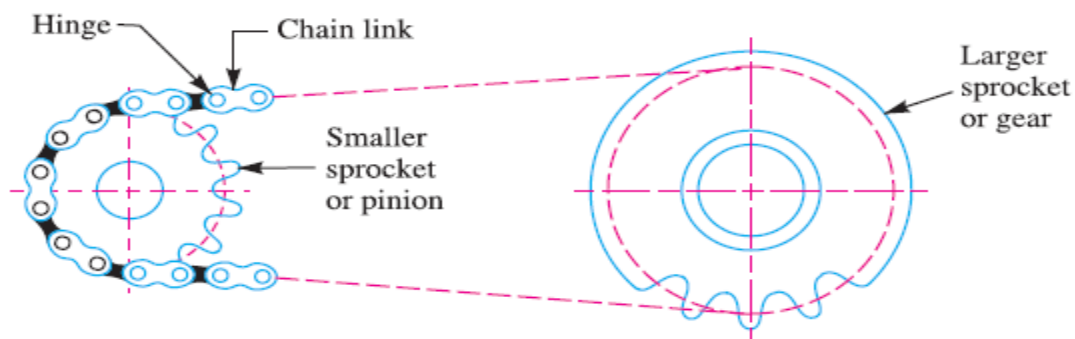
3 Showing roller chain and sprockets assembly [3]
